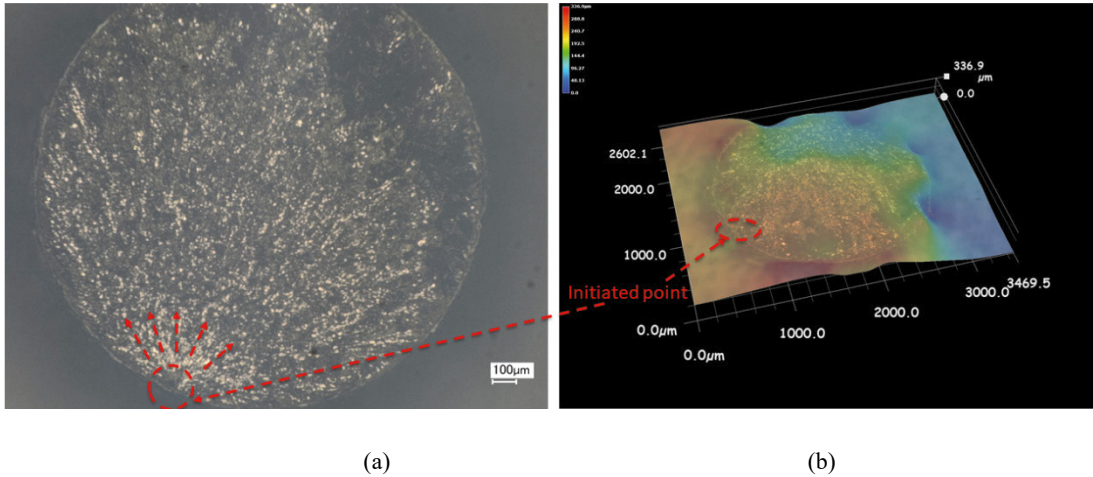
Inspection of the fracture surface: (a) optical microscopy image; (b) roughness analysis
